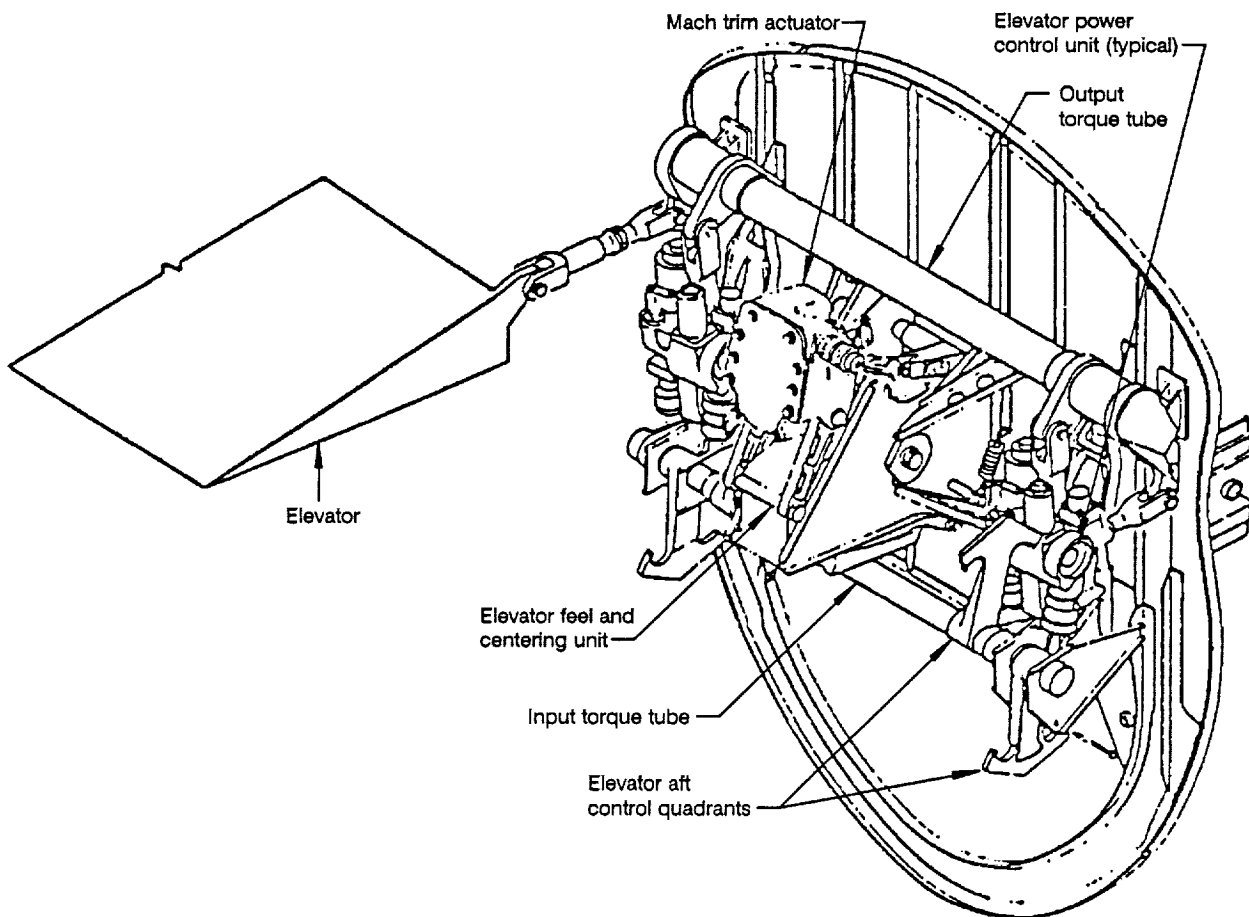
Component Locations Longitudinal (Elevator) Control System
